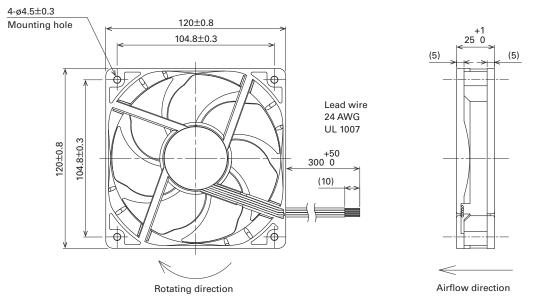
Dimensions of the new San Ace 120 (unit: mm)
